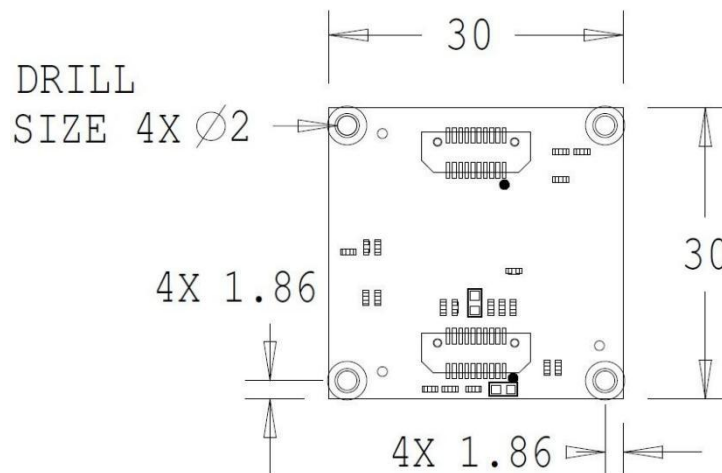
e-CAM22_CUXVR Adaptor Board Mechanical Dimensions
